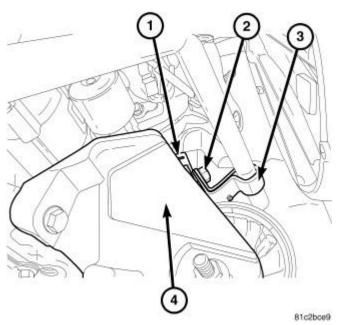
Heater Tube & Ground Courtesy of CHRYSLER LLC
